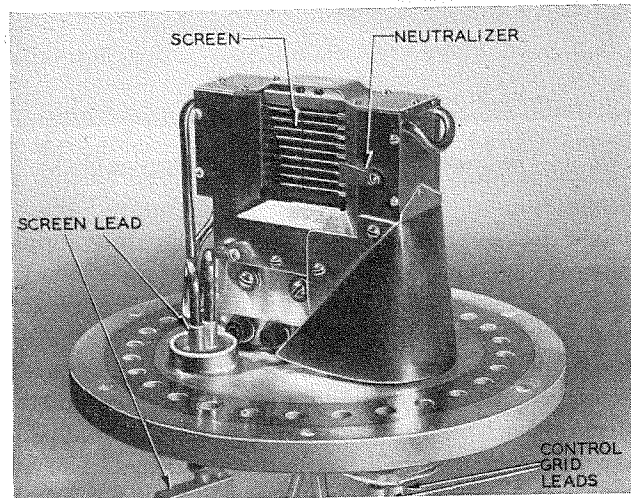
A completed header assembly showing No. 2 grids and neutralizers mounted.
